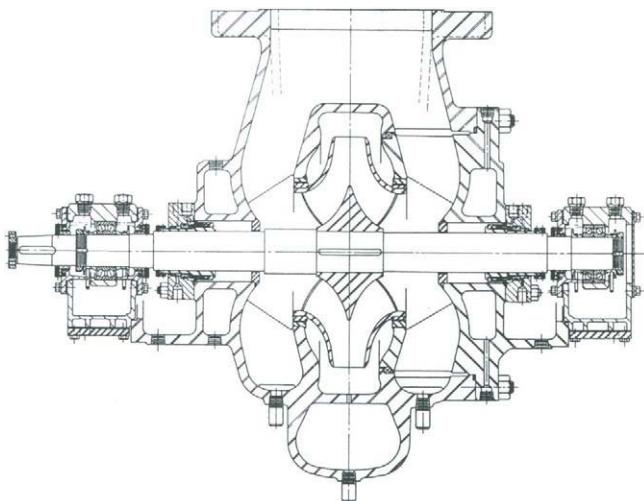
Single stage double flow between bearing (Courtesy of Union Pump Co)
